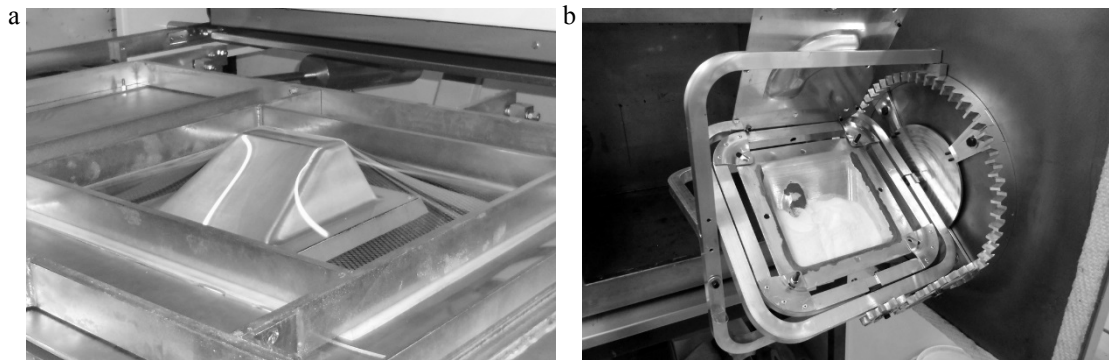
Low pressure thermoplastics manufacturing processes with rapid sheet metal tools: (a) thermoforming; (b) rotomoulding.
